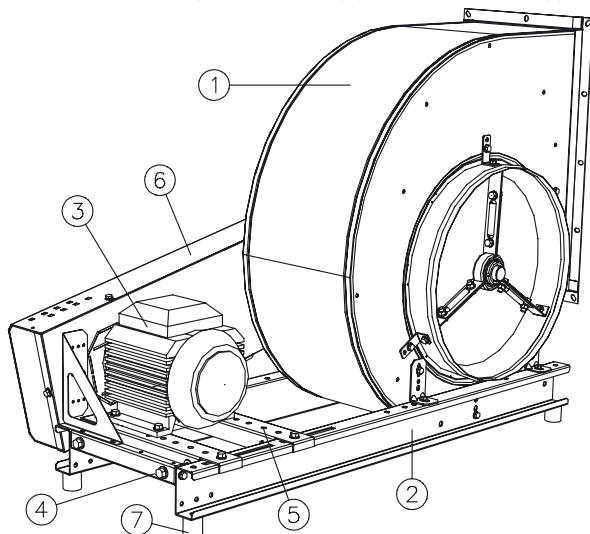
GT-3 fan type construction parts (sizes 025...071).
